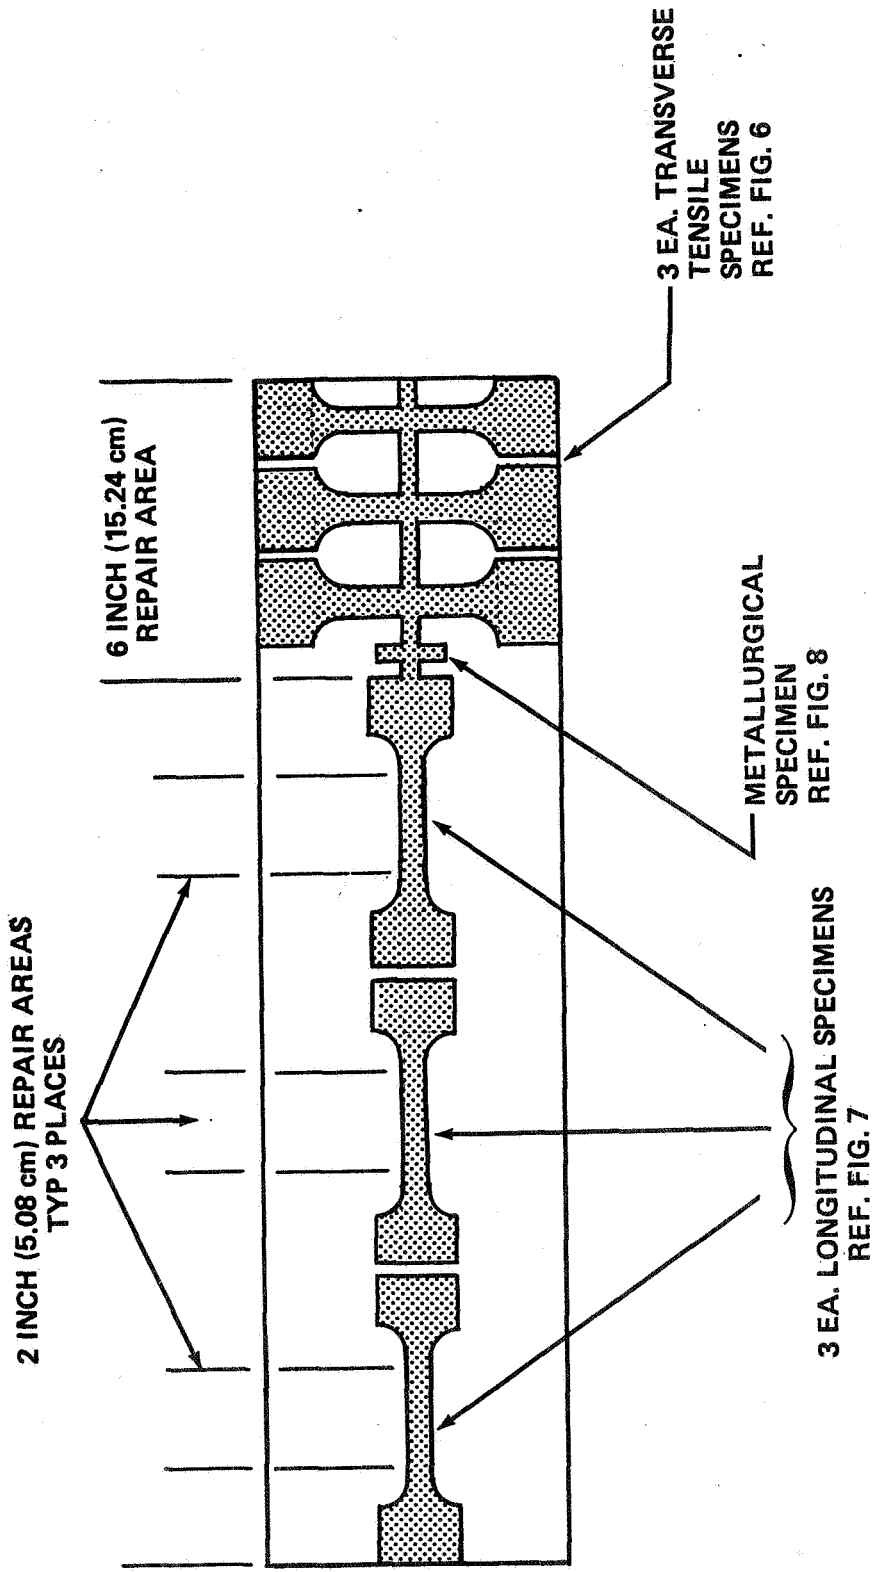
Scheme showing repaired weld tensile specimen removal areas for 1/4-in. (0.63 cm) thick plate Inconel 718.
